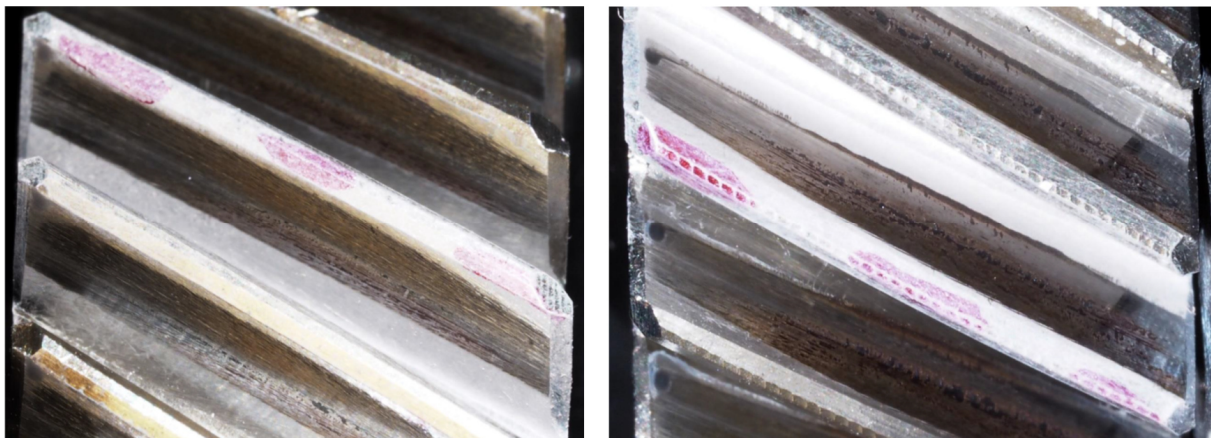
Result of the PM HIP:ed gears summative contact pattern test (6th speed) by nominal test load (torque), gearset 2, gear 1 ($z=48$, left), gear 2 ($z=31$, right)
